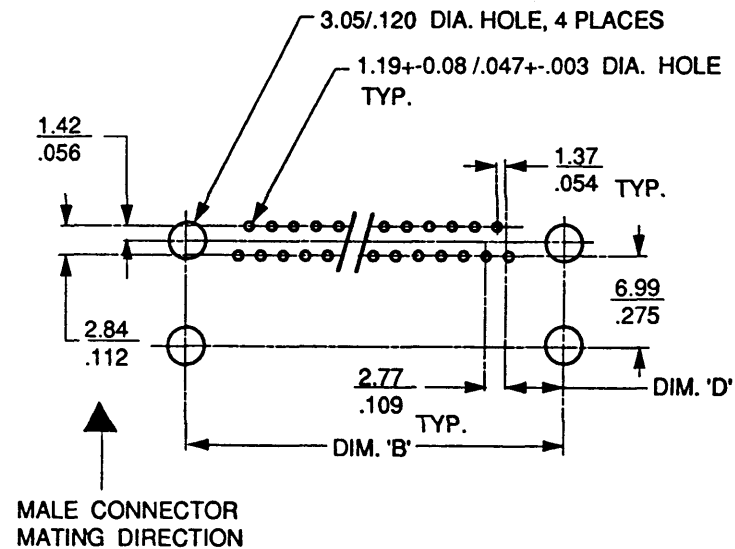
RECOMMENDED PCB MOUNTING LAYOUT
